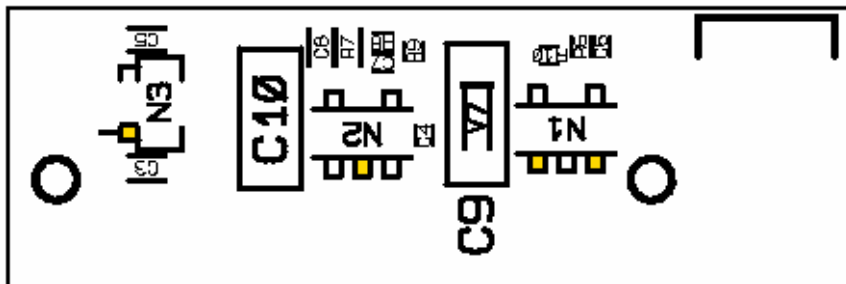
Power Supply Connector of Reverse Power Protection (bottom view)
